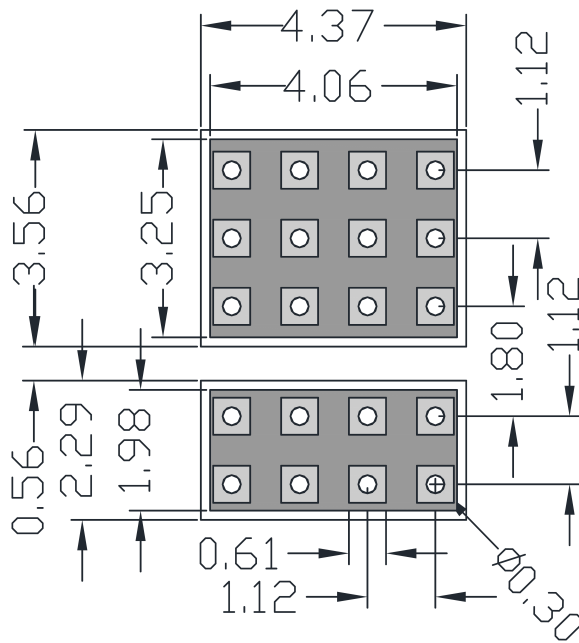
• PD70224 Bottom layer Copper and Solder Paste Recommended PCB Layout for Thermal Pad Array (mm)
